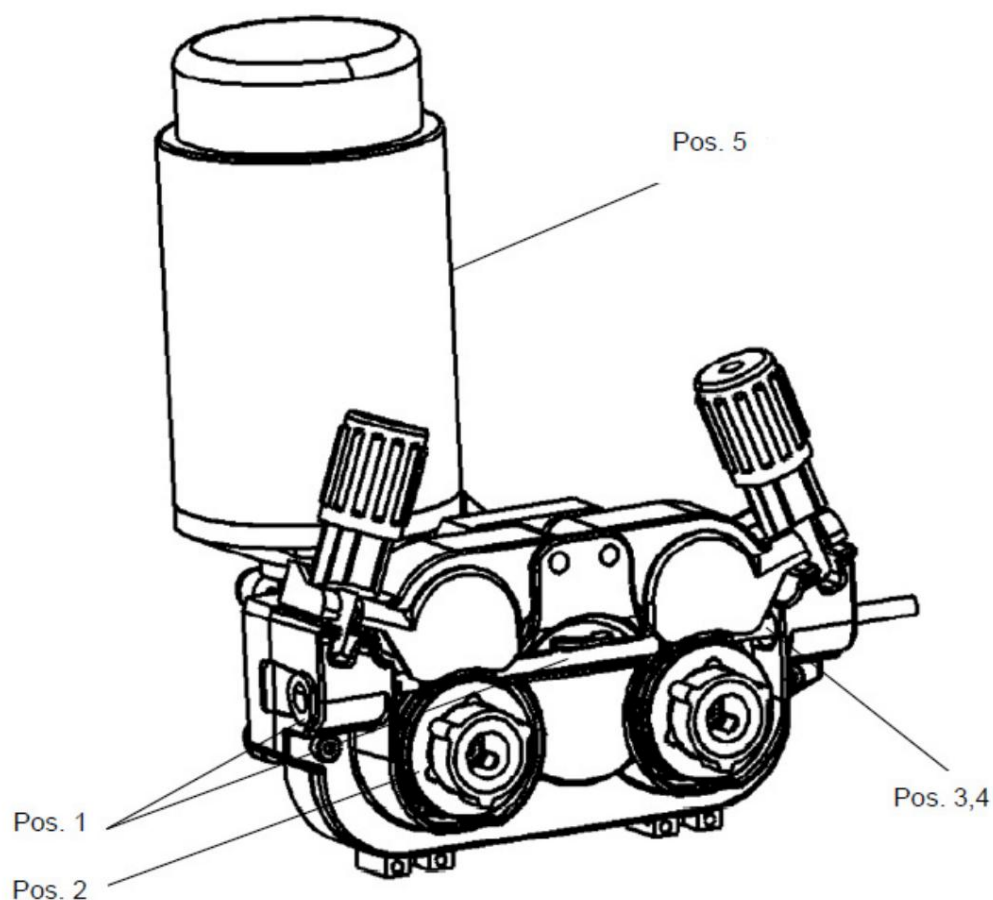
Spare parts drawing for wire feeder, 4-roll drive
